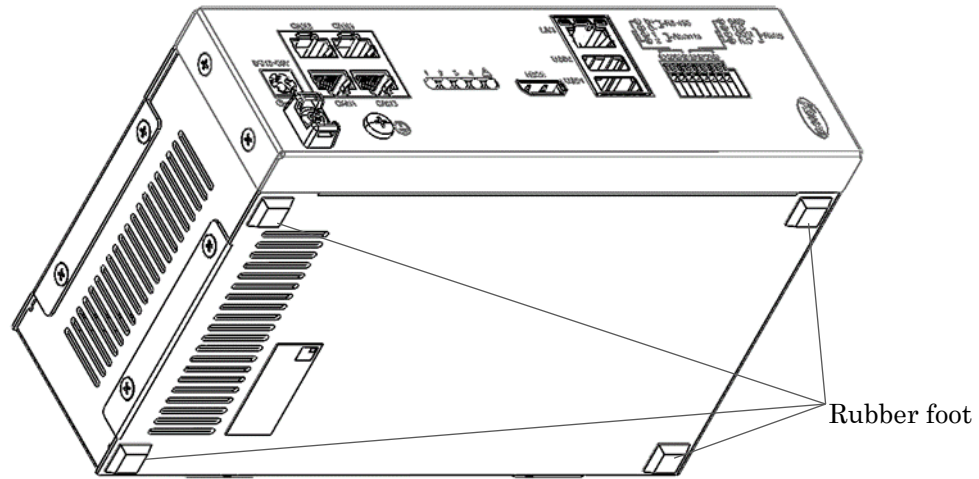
Example of attachment of rubber feet (horizontal installation)
